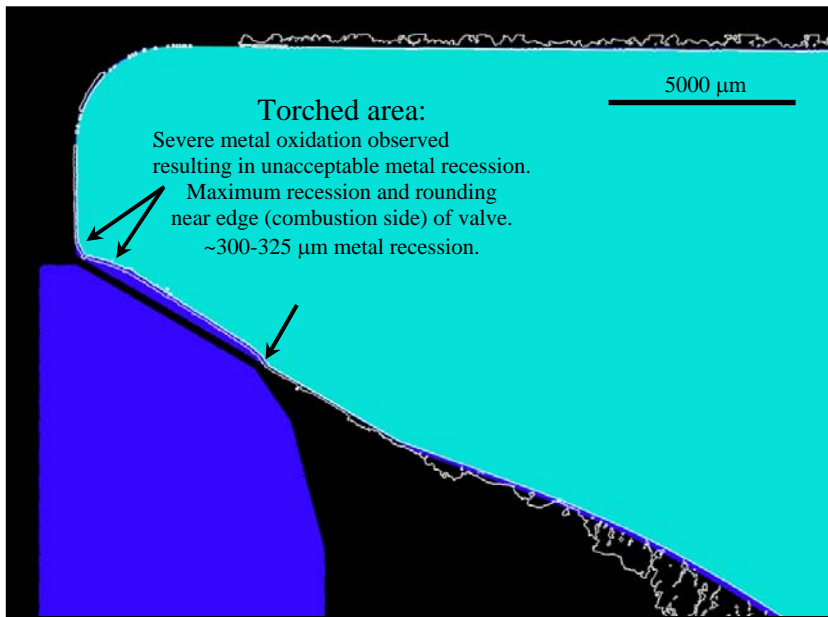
Section 1 from "torched" area of intake valve run in engine for ~24,000 h. Arrows designate valve sealing surface and area exhibiting metal recession.
